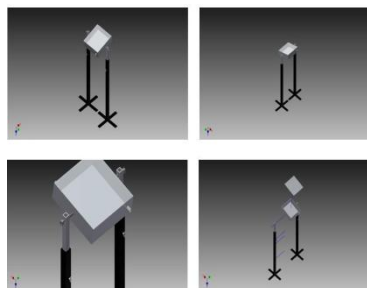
Three-Dimensional drawing of support stand mounted with glass container
